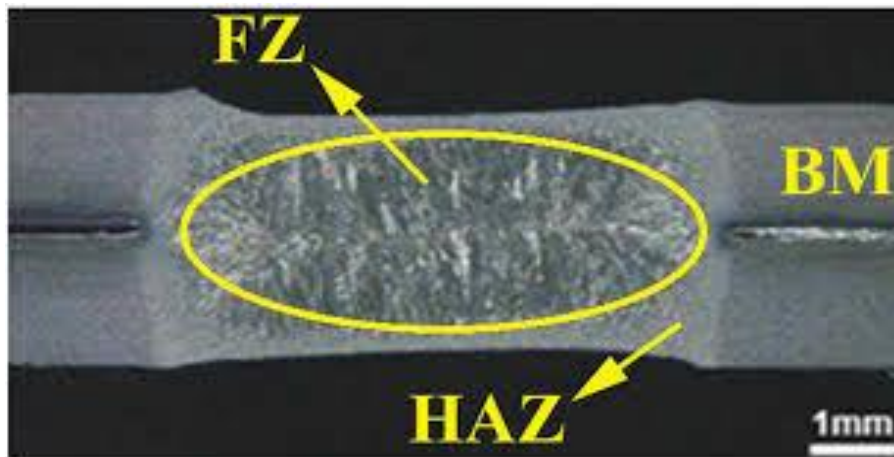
Weld attributes revealed by metallographic sectioning.
